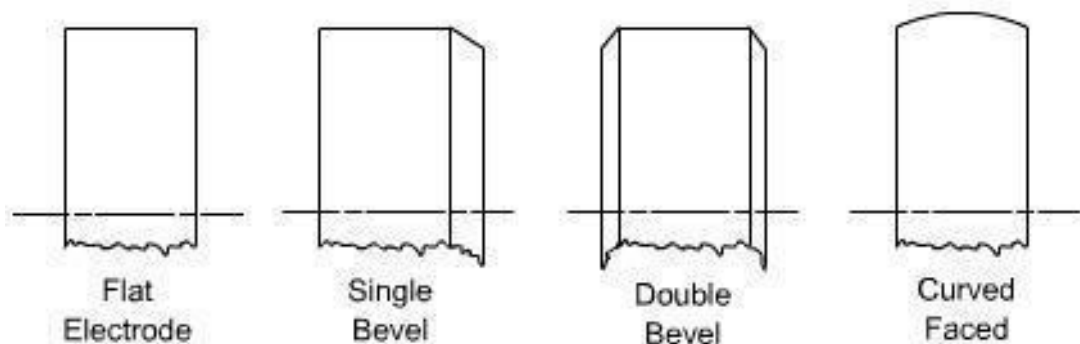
Electrode Shapes of Seam Welding
